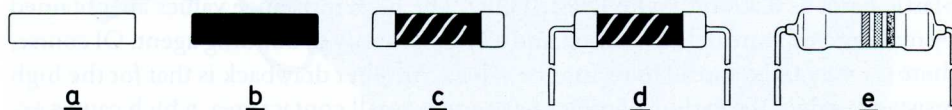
Various manufacturing stages of a carbon film resistor: a. polished porcelain rod, b. vapour deposited carbon film, c. caps pushed on and grooved, d. wires welded on, e. dipped in lacquer with colour code.
